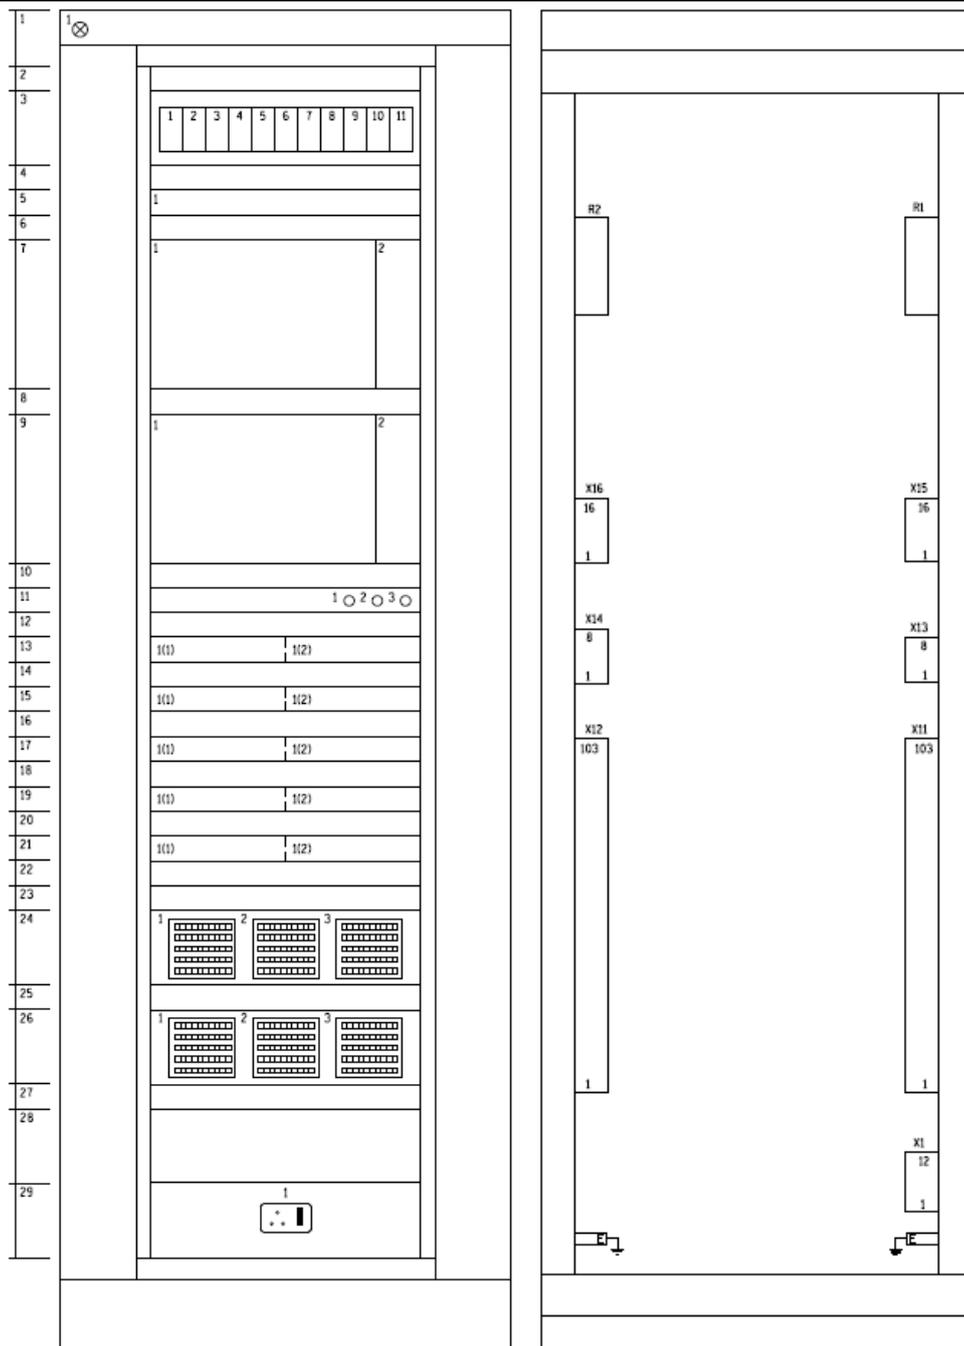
6ACE-2100 Common Equipment Panel - Front and Internal Views
